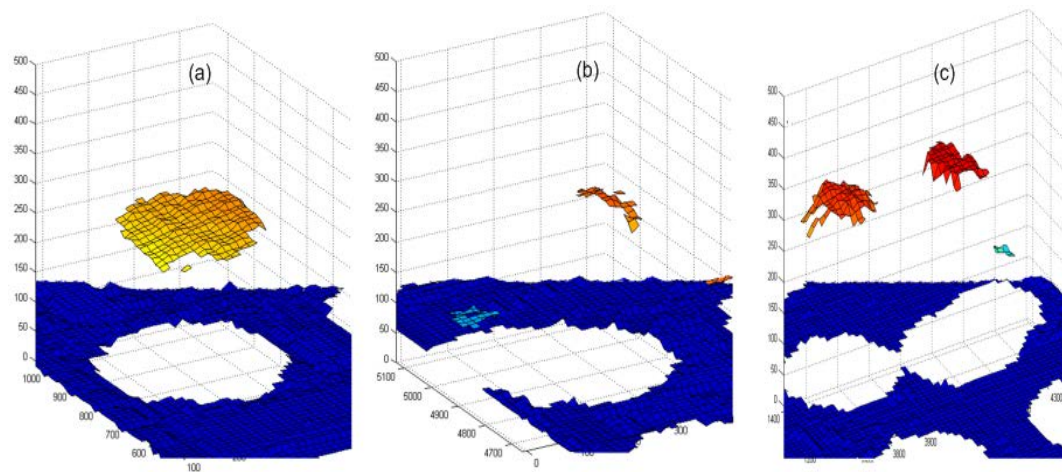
3D view of solder ball defects –(a) Flat top, (b) Incomplete sphere, (c) Incorrect grid location
